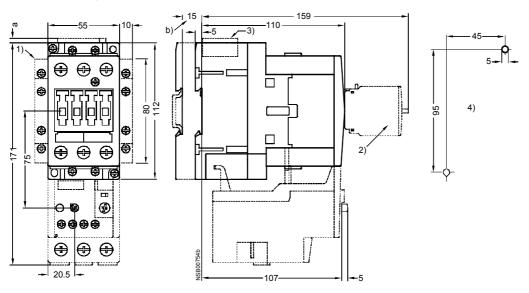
3RT10 3 contactors with surge suppressor, auxiliary contact block and installed overload relay
